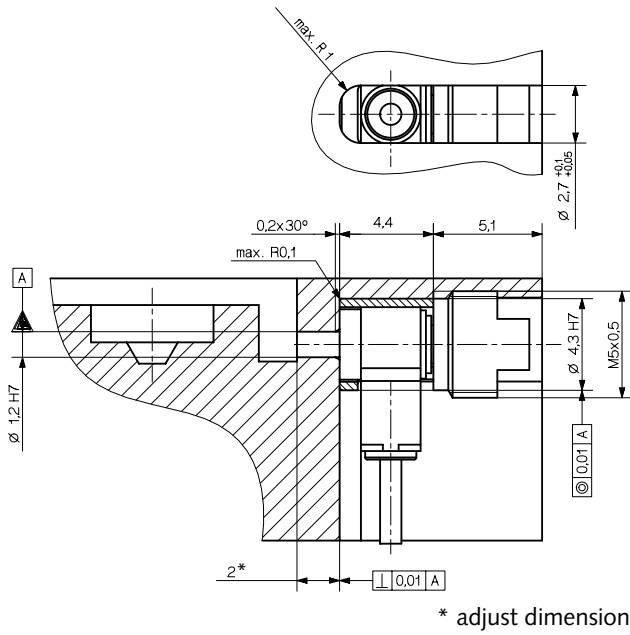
Mounting with spacer sleeve Type 6466 and mounting nut Type 6465
